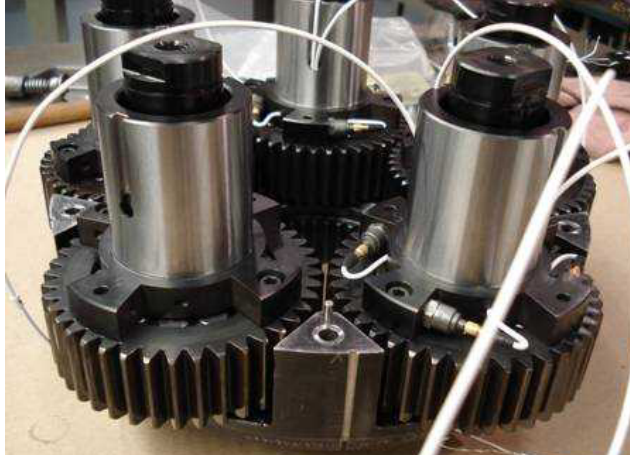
PLANET ACCELEROMETERS ATTACHED TO RIGID ADAPTER FLANGE.
